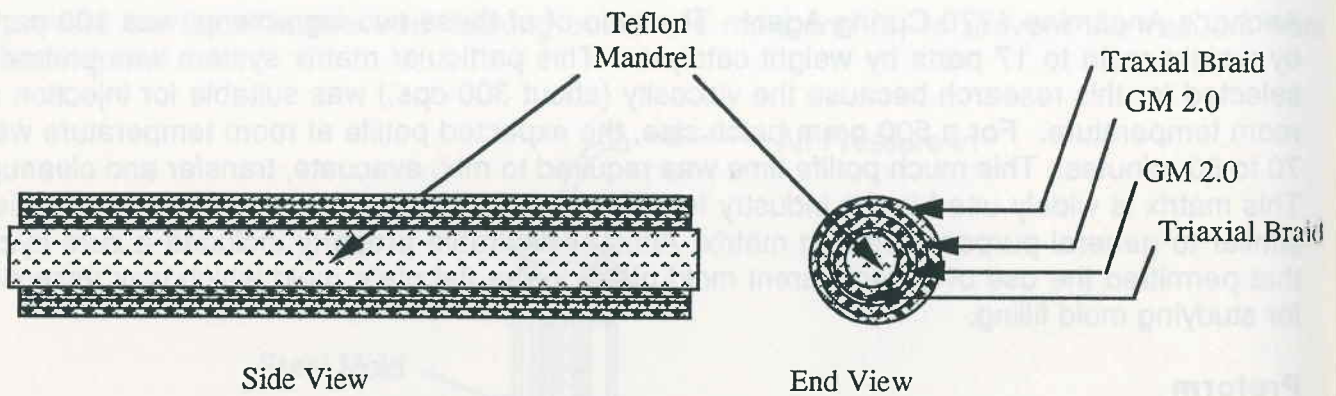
, Illustration of Preform Ply Arrangement for Group 2 Tubes on Mold 2 Mandrel
